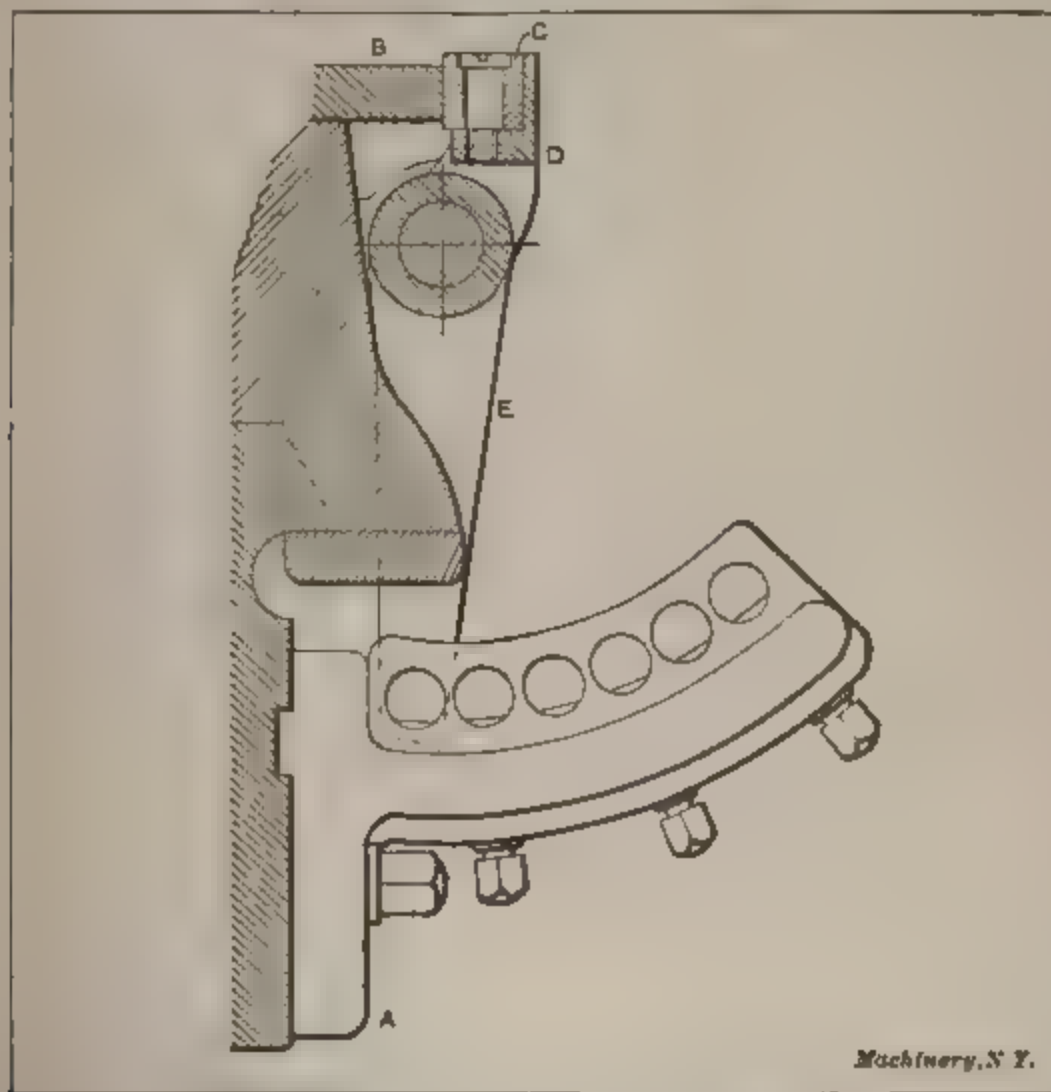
Turret Lathe Stops used on the Pratt & Whitney Turret Lathes
